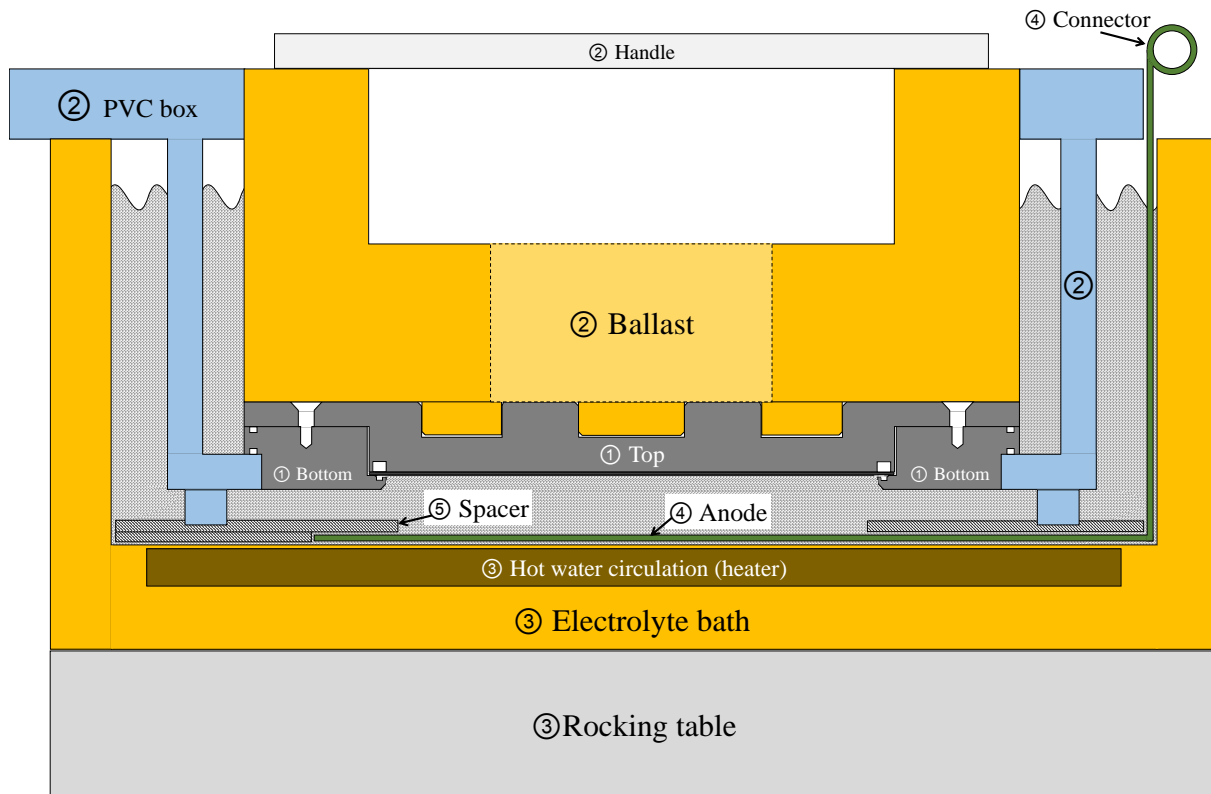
Cross-sectional sketch of a lab-scale electroplating tool.
